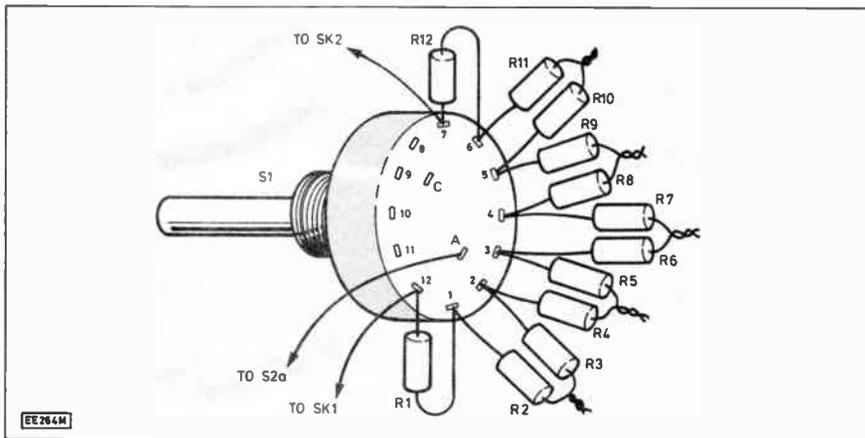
Range selector switch S1 detailed assembly. The "free ends" of the resistors should be twisted together in pairs and soldered.
